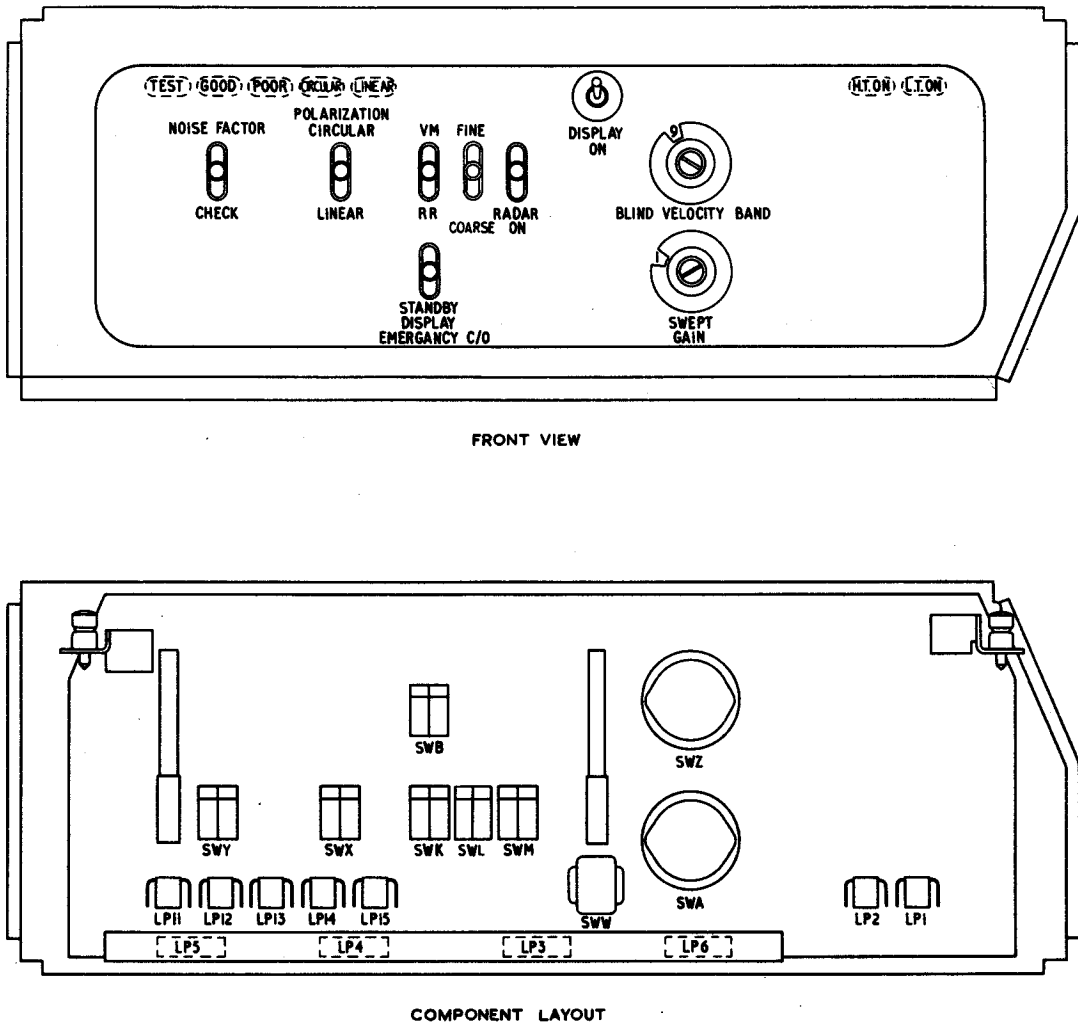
Panel (control desk) L.H. M3: front view and component layout
